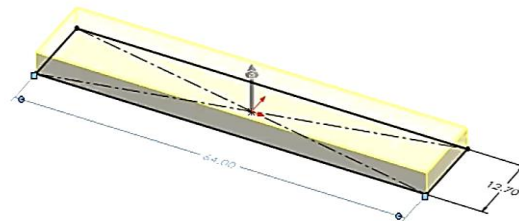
Dimensions of ASTM D 256 Impact Test Specimen (ASTM Book)
